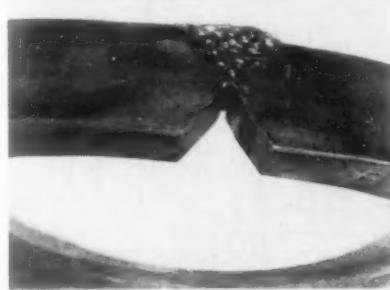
Partially welded RC-A70 bar; 30-inch diameter, 2 x 3 1/2-inch section. Joint preparation is shown.
